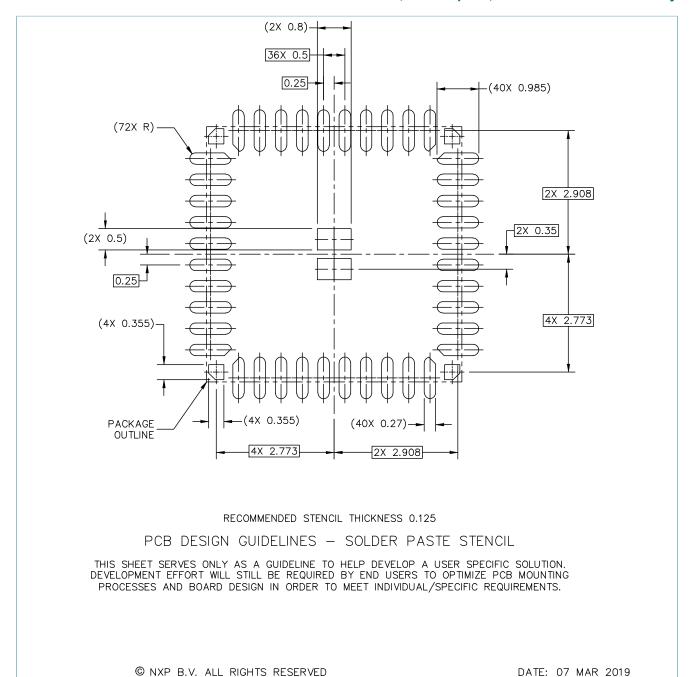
Reflow soldering footprint part3 for HVQFN40 (SOT618-16(SC)
